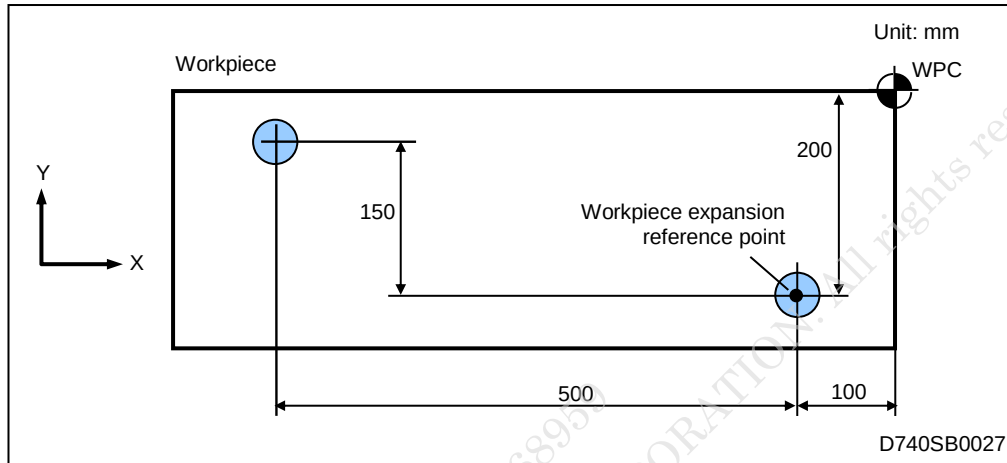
Hole machining in a flat aluminum plate (MAZATROL)
